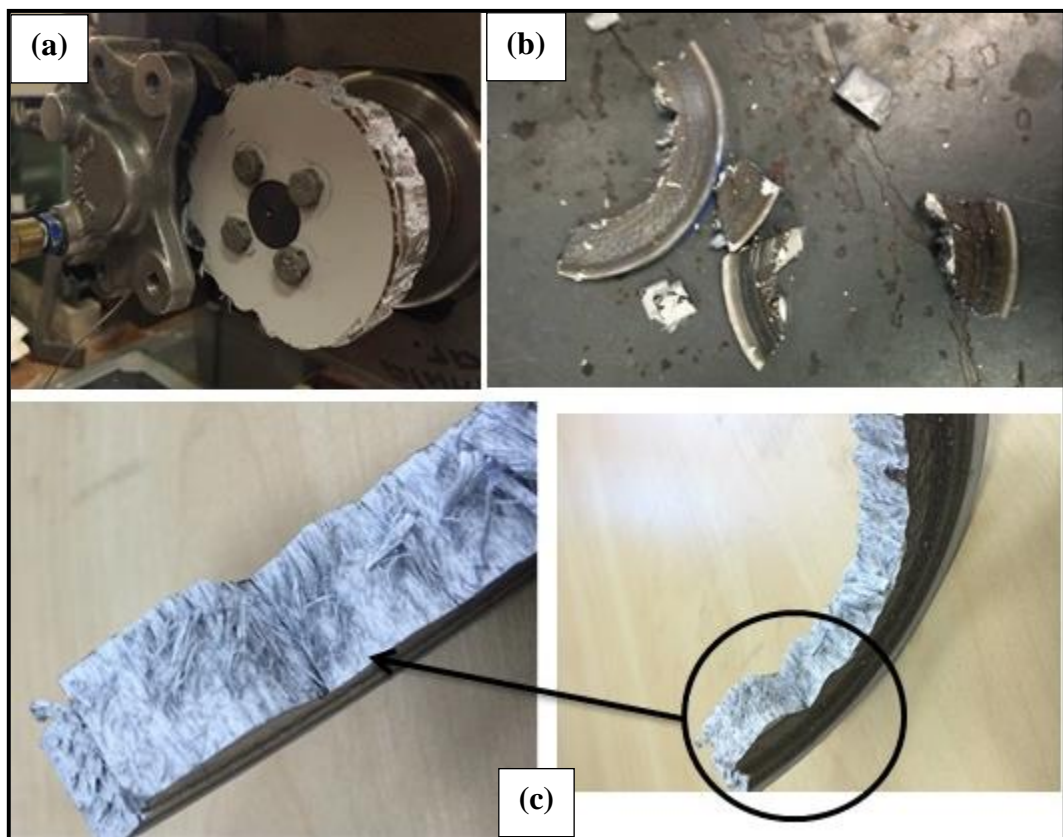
Coated wrought aluminium disc brake rotor after extreme braking condition.
